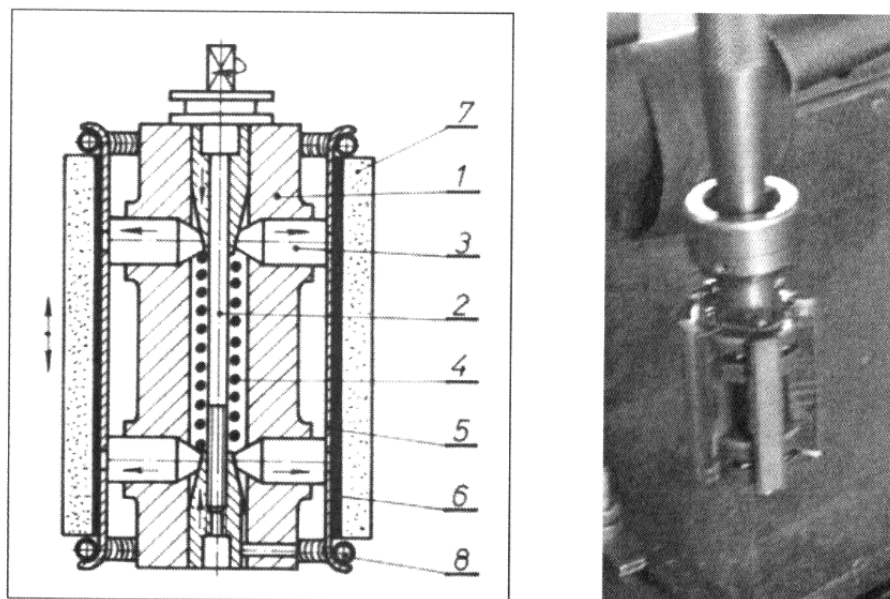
Honing head (1 – body, 2 – spindle, 3 – fasteners, 4 – spring, 5 – grindstone holder, 6 – grindstone neck, 7 – grindstone, 8 – springs)
